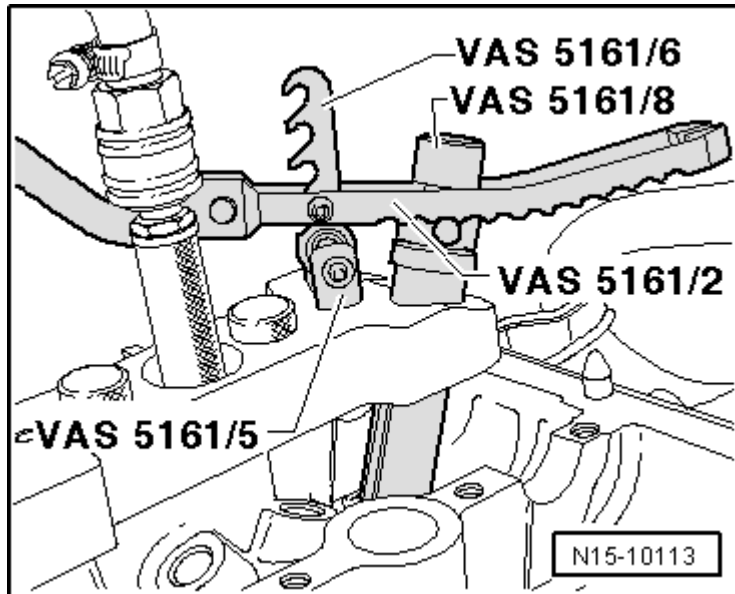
Identifying Pressure Forks VAS 5161/2 Engaged
